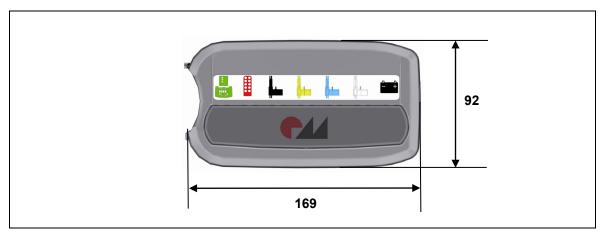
Dimensions of the MC11 control unit, top view (in mm)
